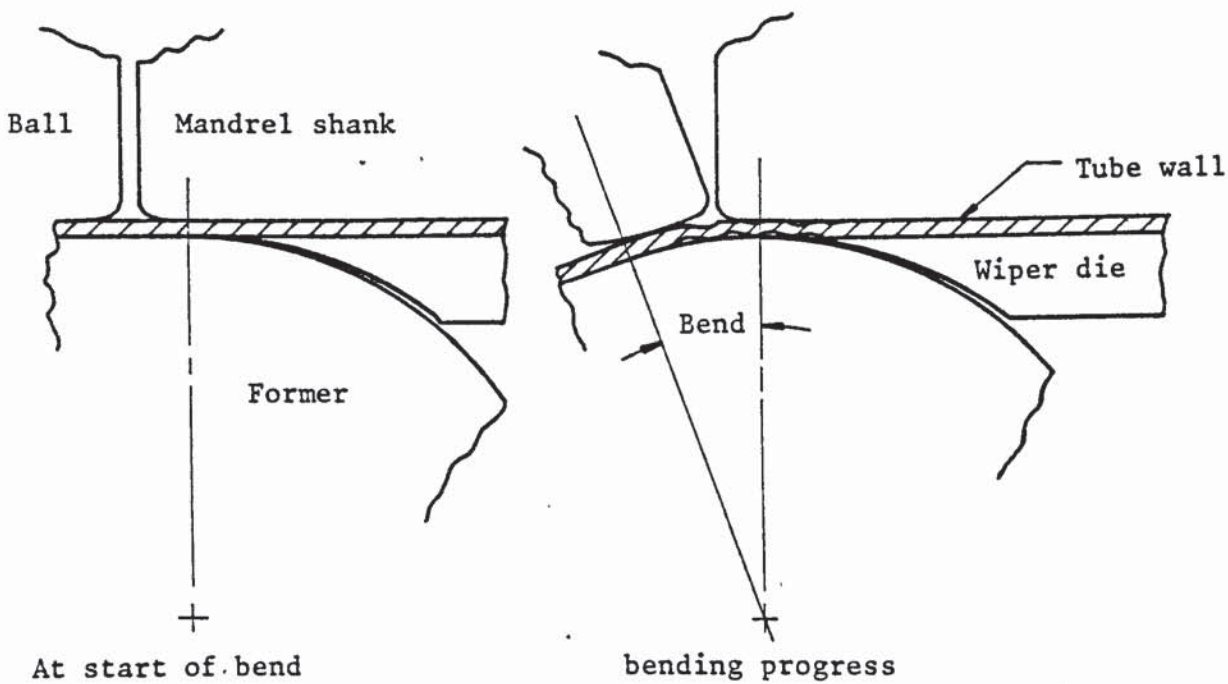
Improper setting of wiper die causes wrinkles on the bend inside
